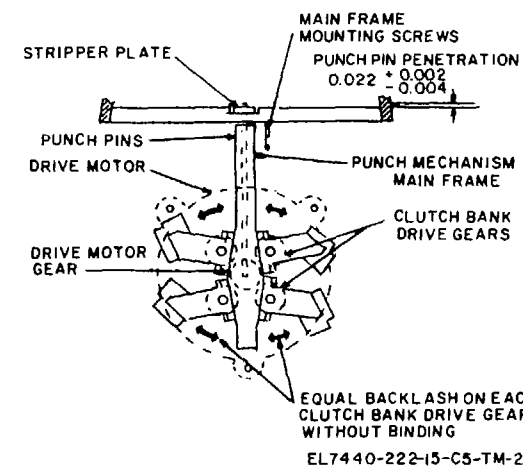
Clutch bank drive gear backlash and punch pin penetration requirements.
